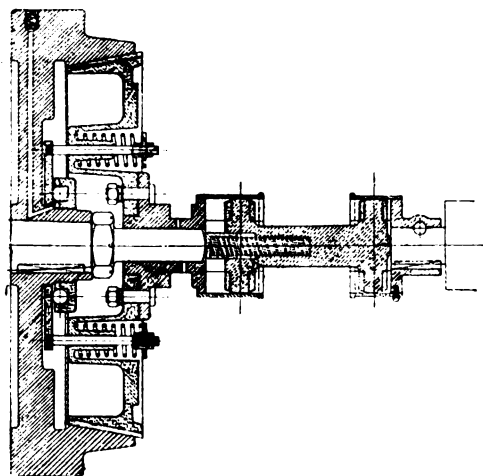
SECTION OF VELOX FRICTION CLUTCH.
